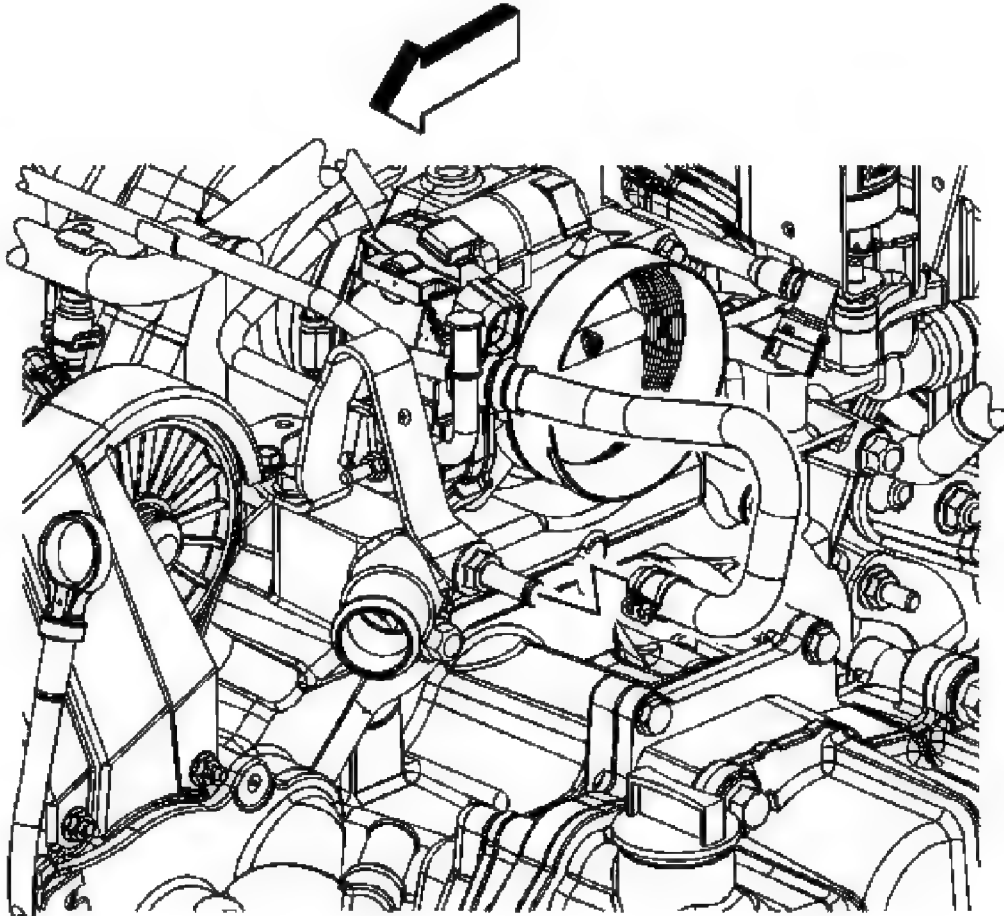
View Of Surge Tank Inlet Hose/Pipe
